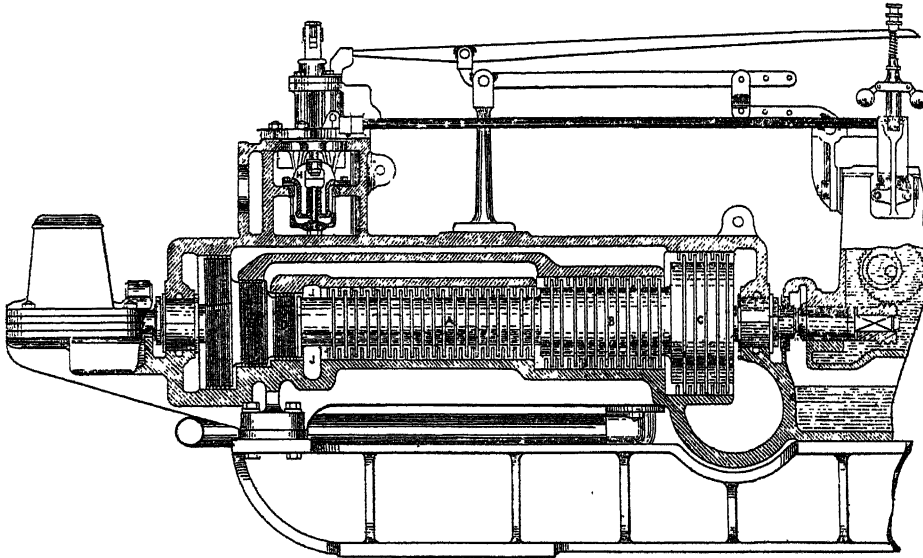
Sectional view of a Compound Turbine, showing the turbine blades and also the steam admission valve and bearings, as well as the governor gear.
